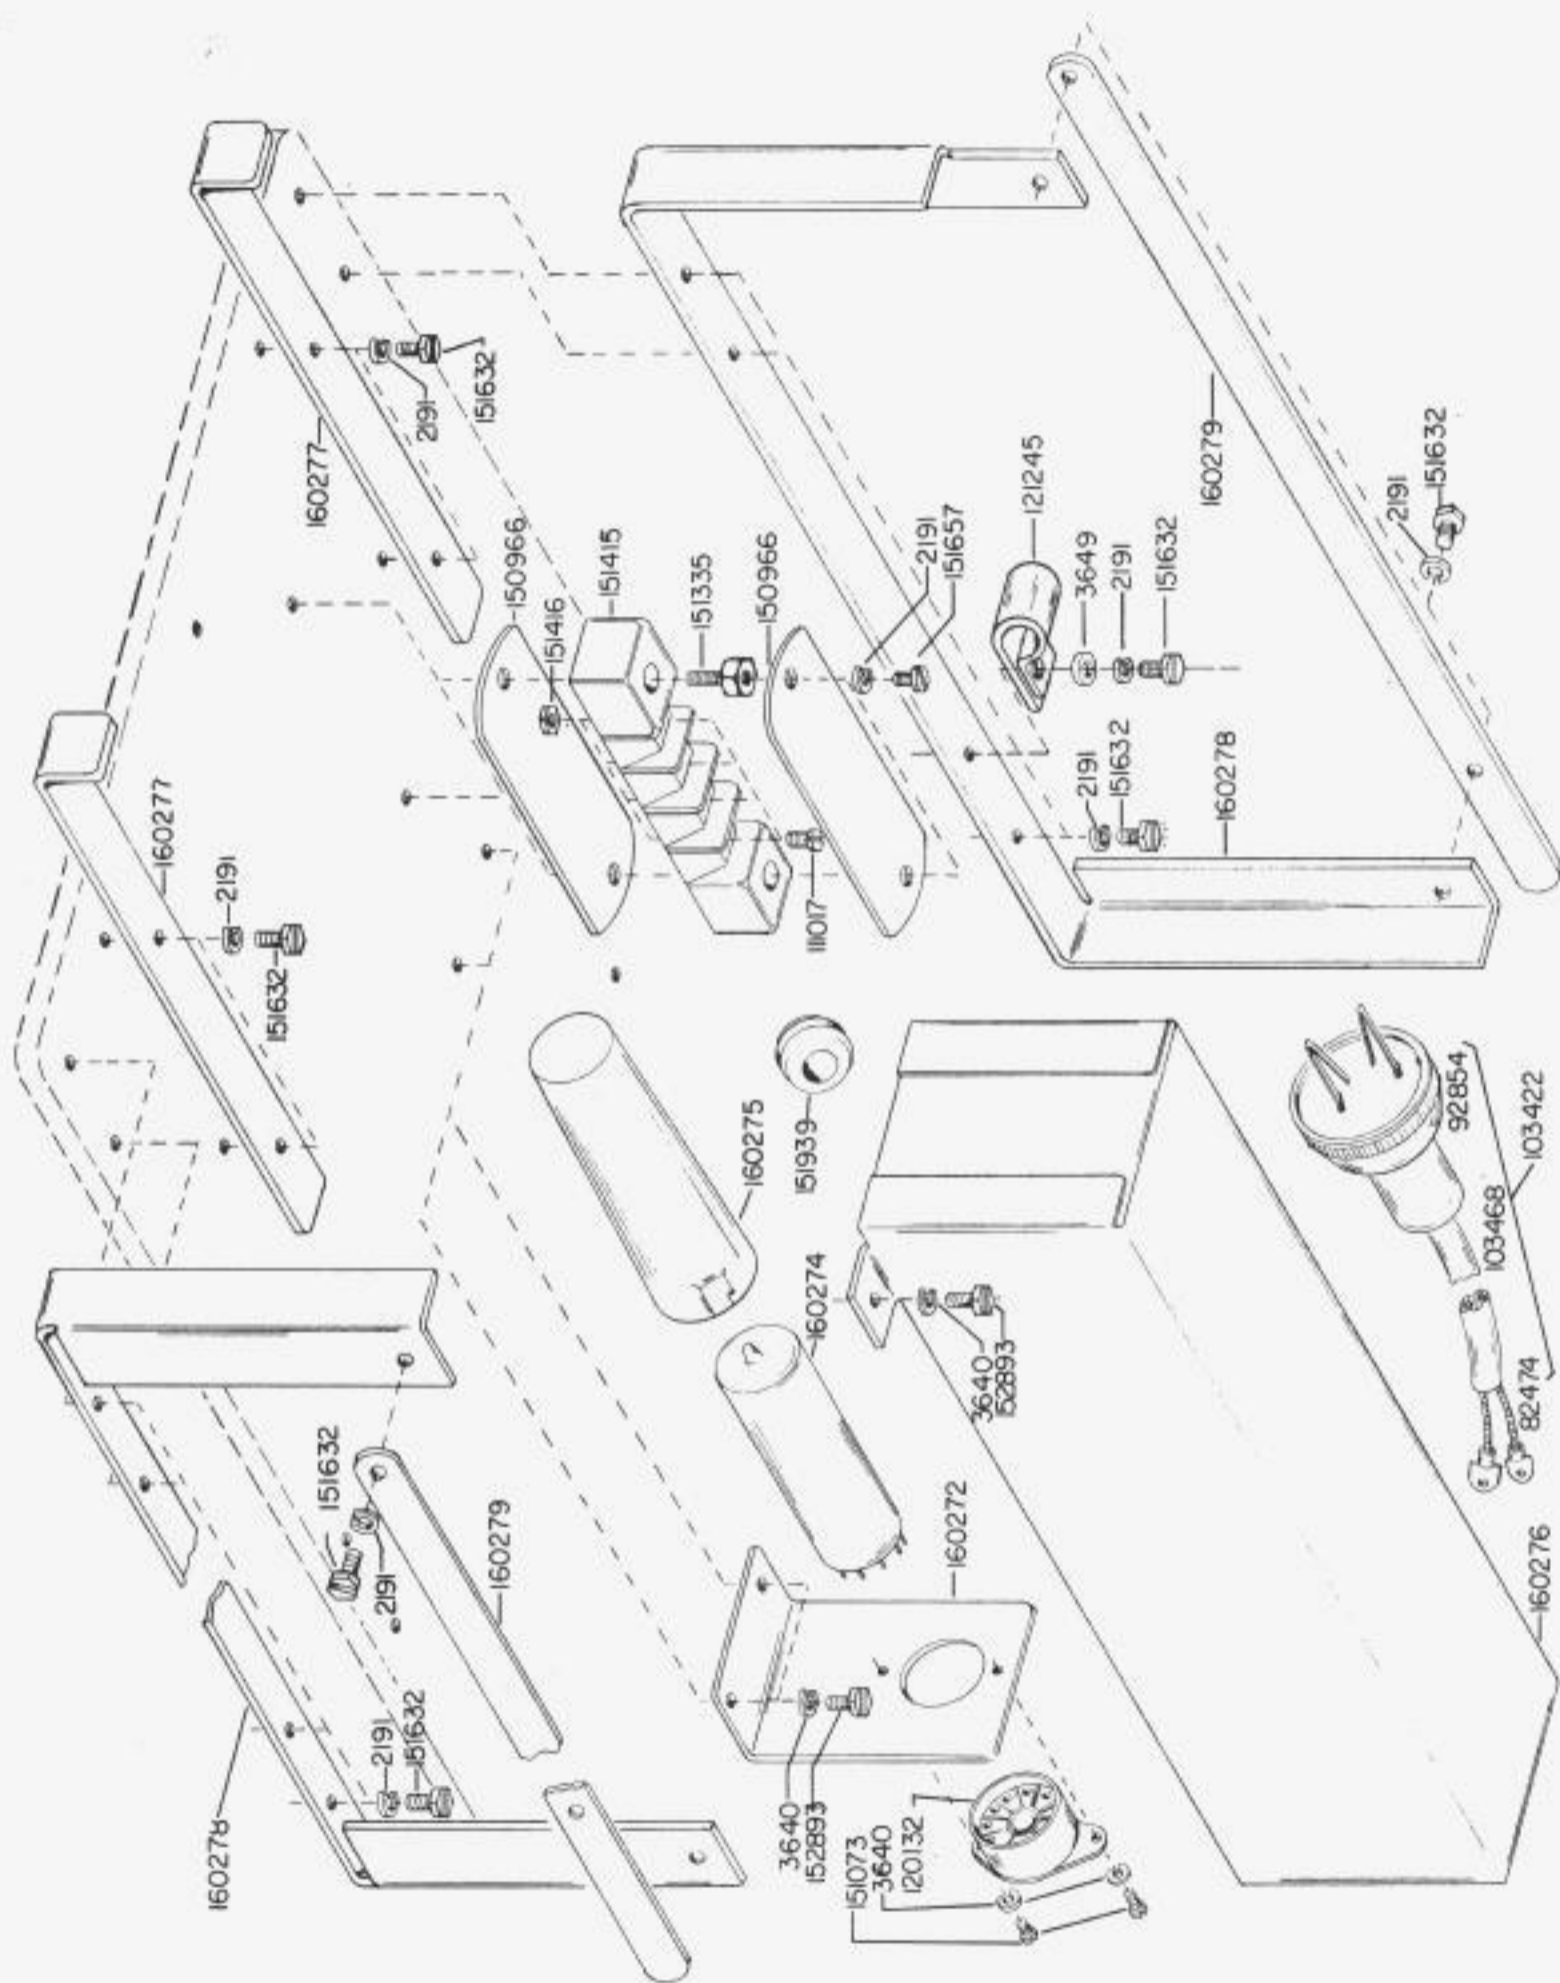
DELAY RELAY AND MOUNTING PARTS
